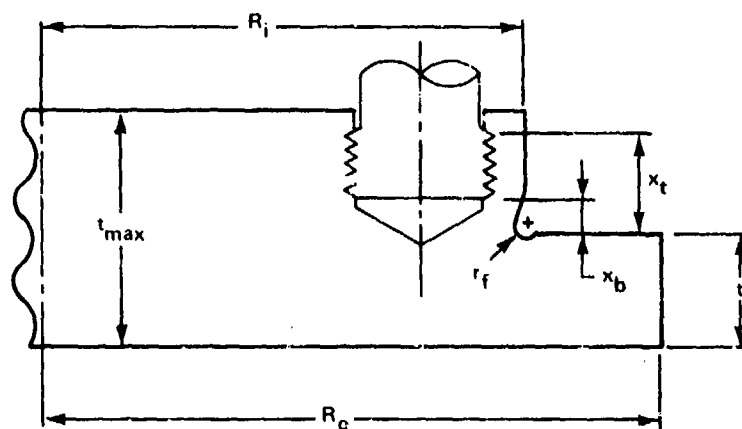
Dimensions Used in Table 2 for Blade Flange
